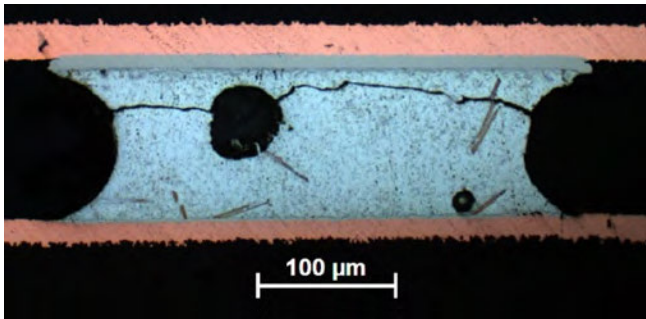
Representative failure mode for bulk solder failure of LGA joints on Cu-OSP PCB surface finish.
